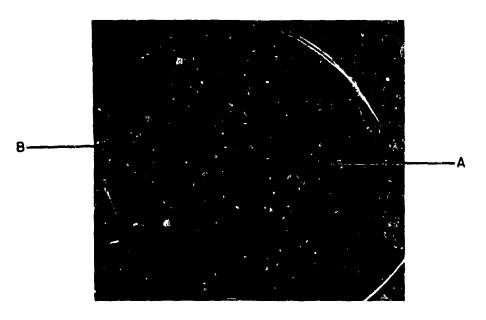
Fracture surface of a hydrogen-embrittled HY-130 fatigue specimen, 10x.
